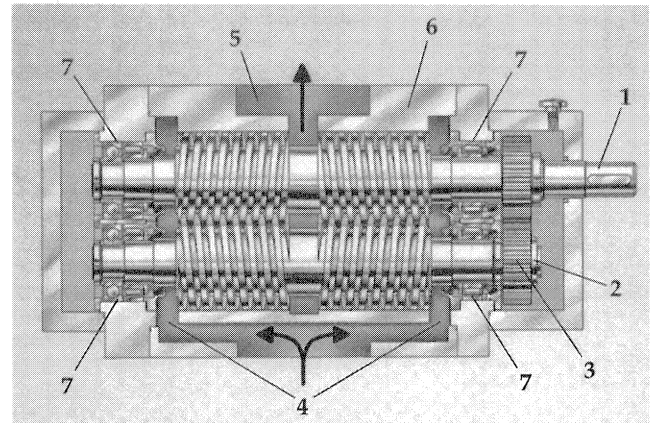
Double Flow Twin-Screw Pump with External Bearings and Gear. (1. Driving shaft; 2. Driven shaft; 3. Gear; 4. Suction; 5. Discharge; 6. Housing; 7. Bearings) (Courtesy of Körner, 1998)
